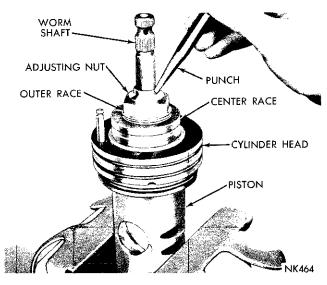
Staking Wormshaft Bearing Adjusting Nut
